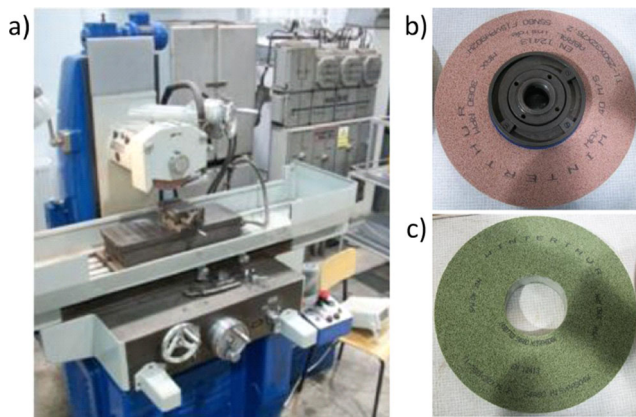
Precision surface grinder, type 3G71S (a), 55N (b) and 56A grinding wheel (c)
